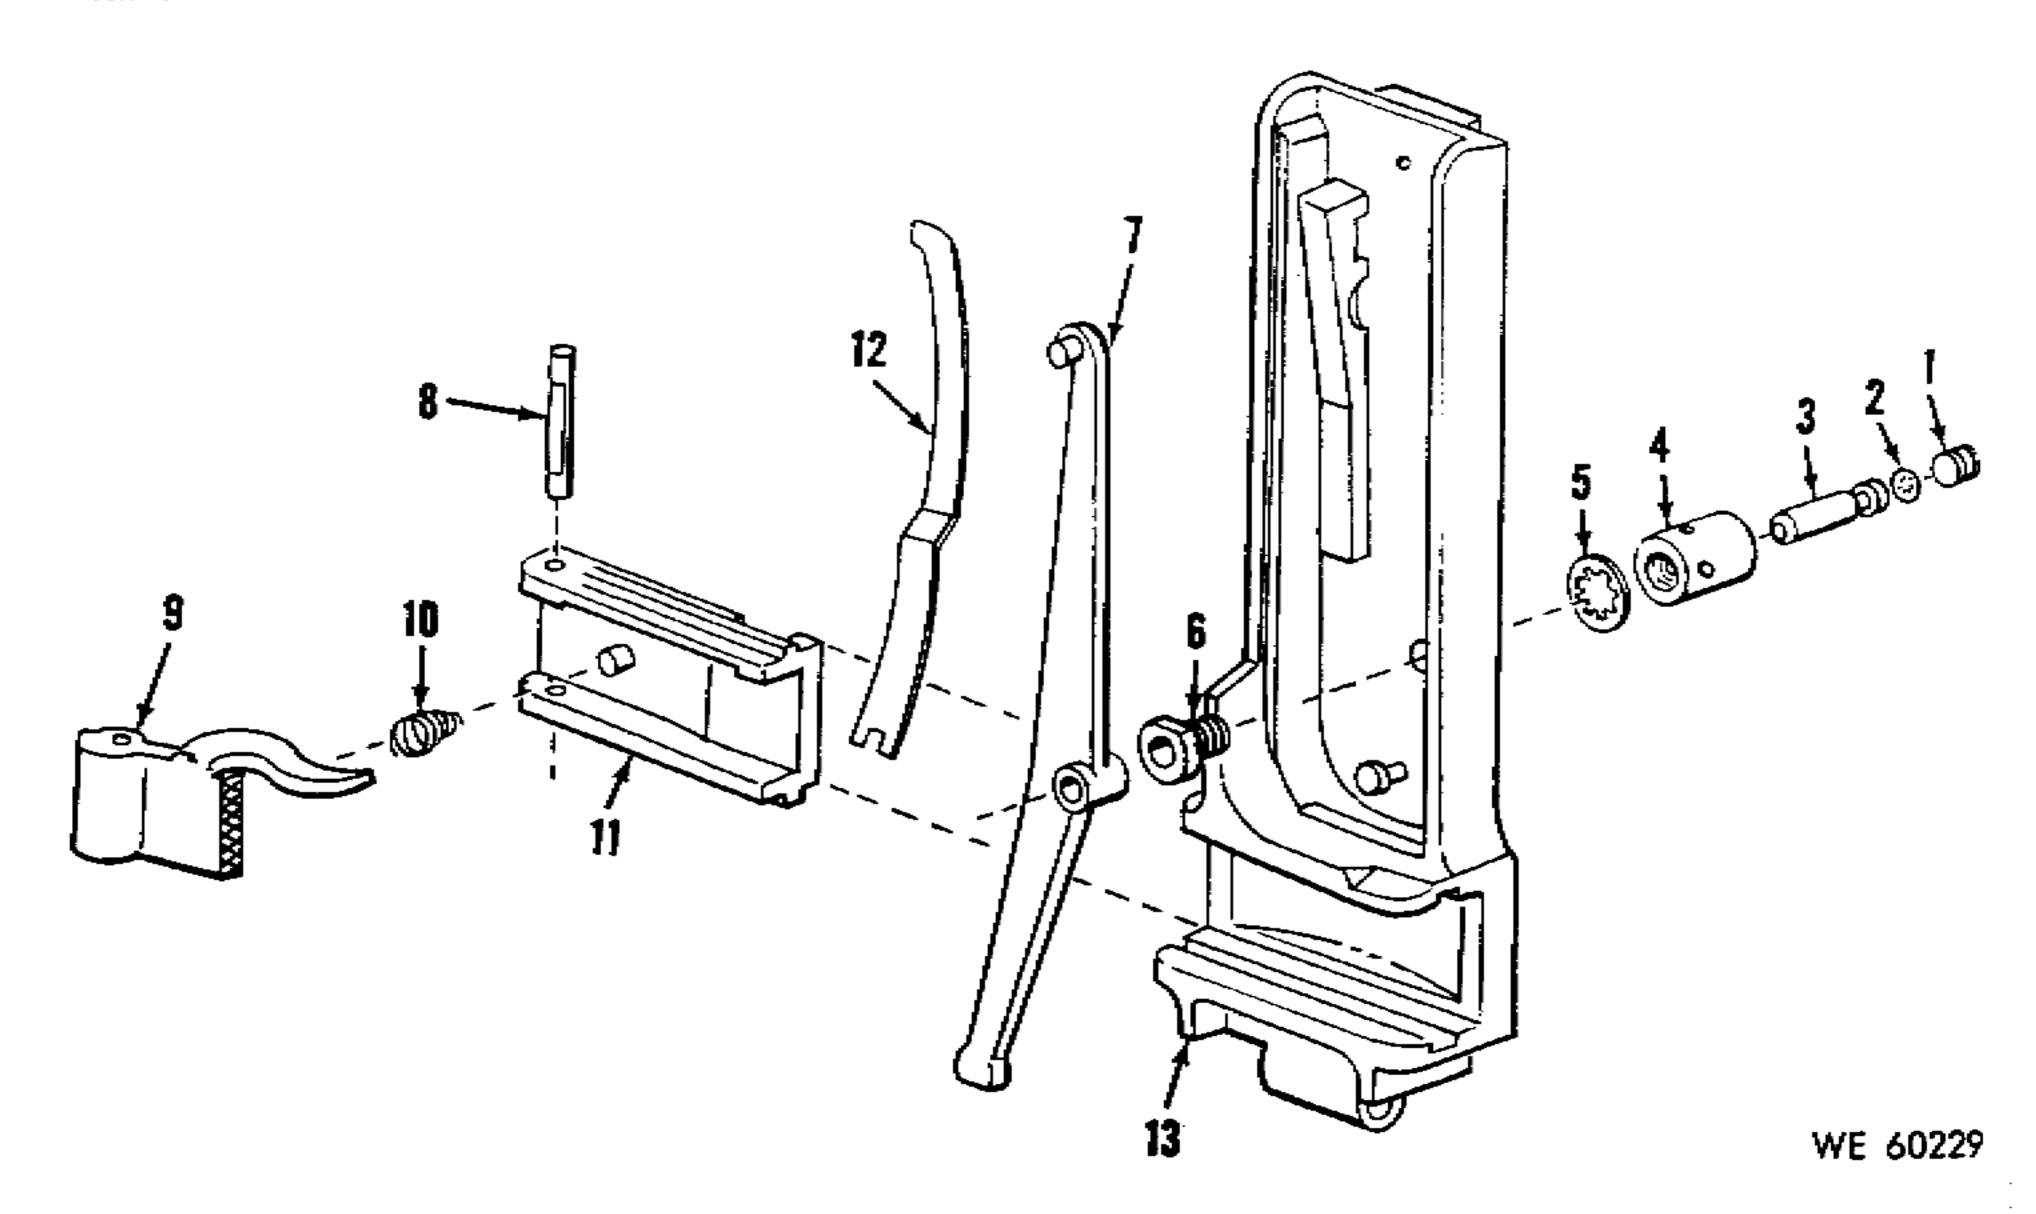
Cover group for Caliber .30 Machine Guns, M1919A4 and M1919A6 only—exploded view.
